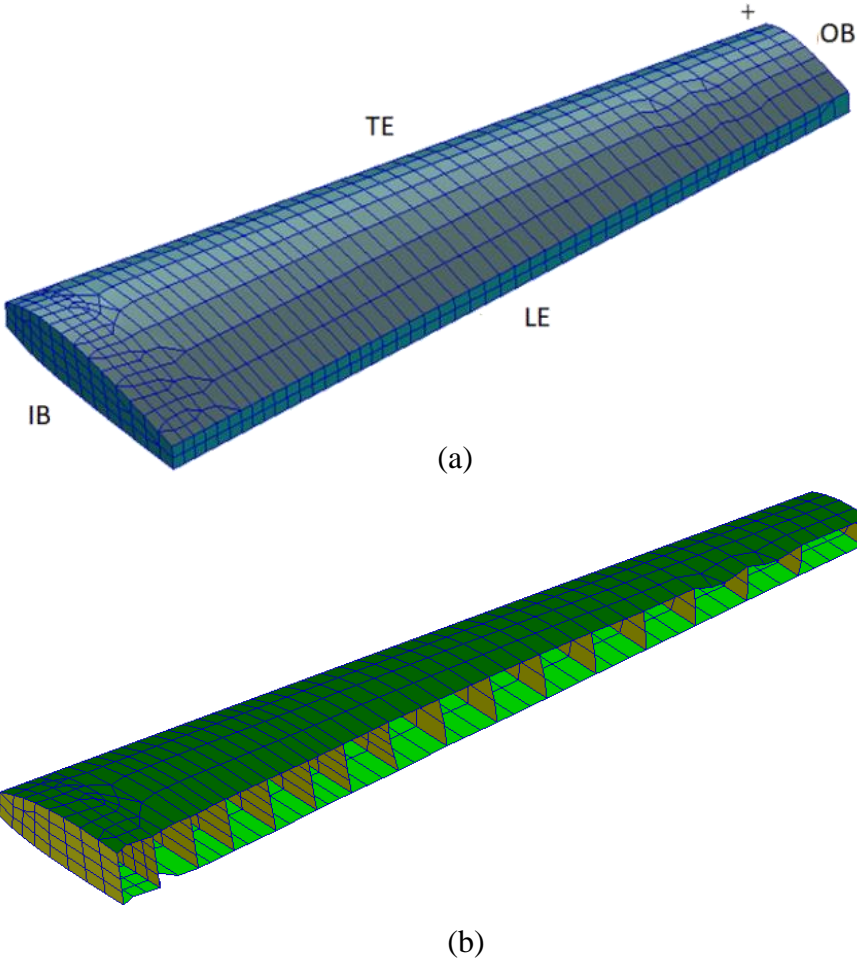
FE model of the wing box (a) global; (b) cross-sectional view
